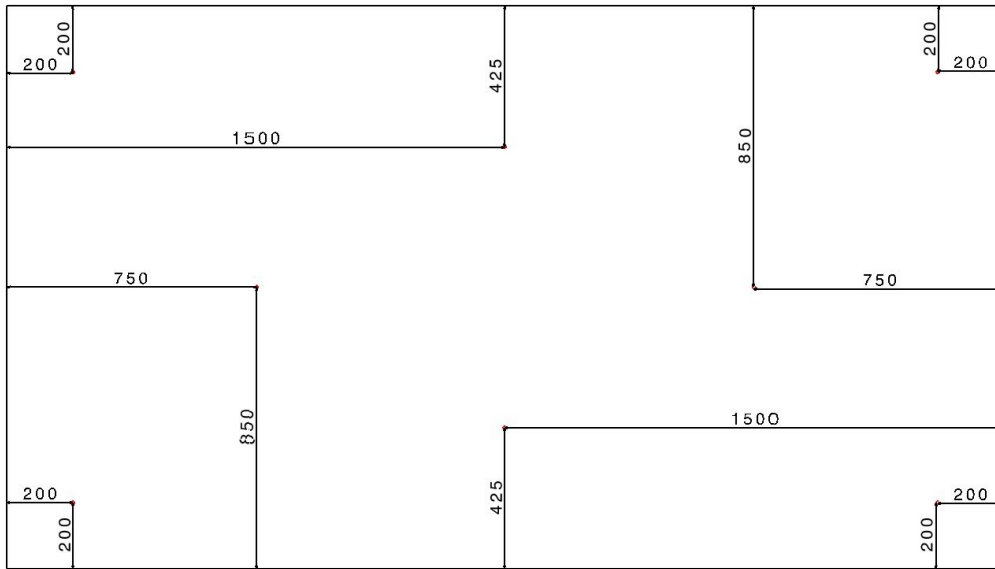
Location of holes for the levelling mounts (dimensions in millimeters)
